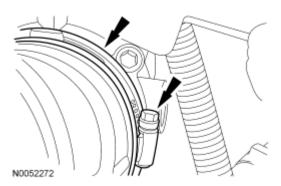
Identifying PTU & Bolts Courtesy of FORD MOTOR CO.
